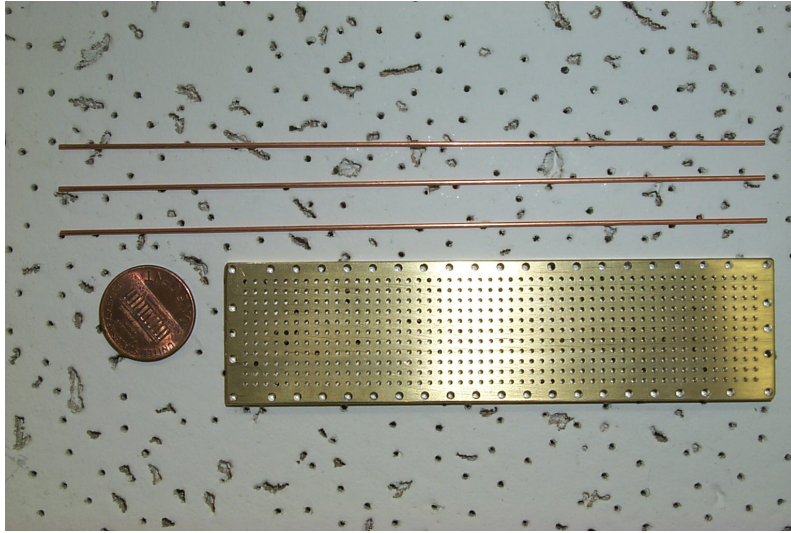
Micro tubes (outside diameter = 0.95 mm, inner diameter = 0.7 mm) and header.
